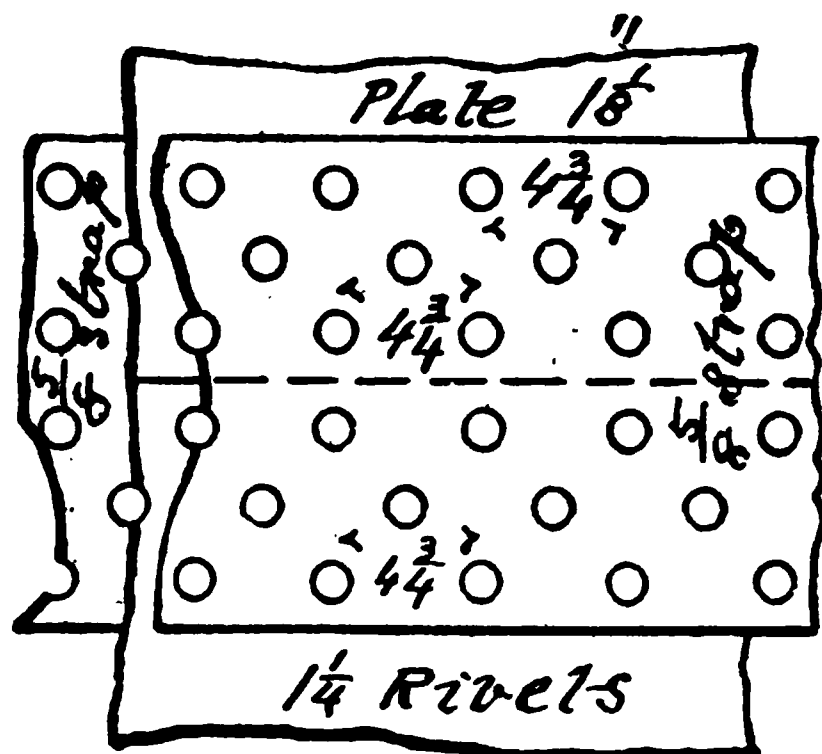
ORDINARY TRIPLE-RIVETED DOUBLE BUTT STRAP JOINT.
